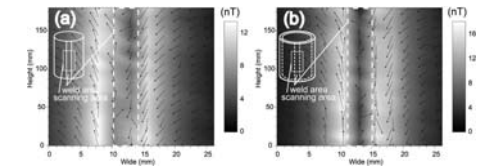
Eddy current images of the stainless-steel welding sample (a) welding part is on the surface (single layer), and (b) the welding part is inside the stainless-steel tube (double layer). The frequency of the applied magnetic field is 20Hz.
